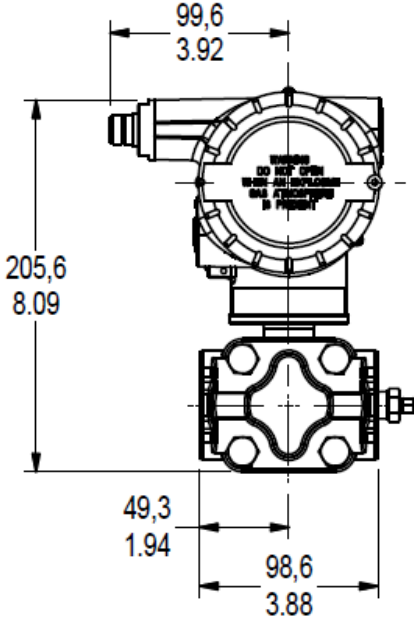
Dual Head, typical mounting dimensions for STAW740 (remote adaptor shown)
